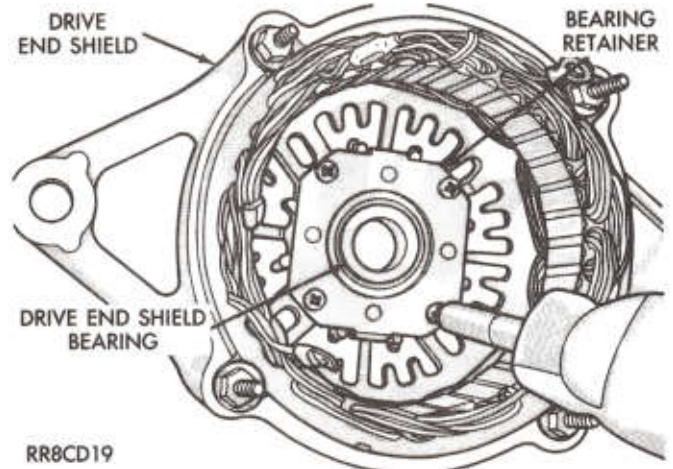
Remove or Install Drive End Shield Bearing Retainer
